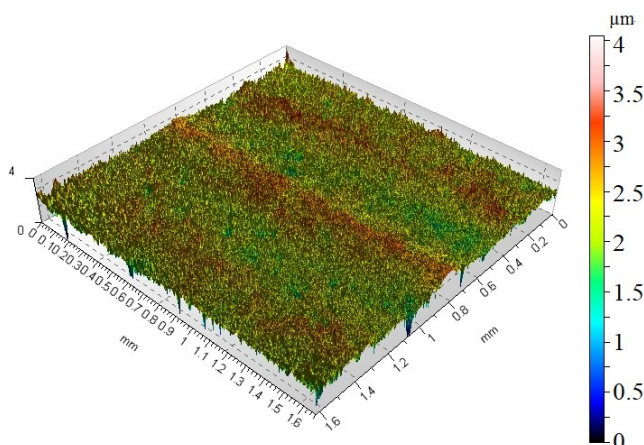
Three-dimensional optical surfaces of the brass bushing after vibratory deburring and polishing with abrasive paste on 90 min; $S_a = 0.26 \mu\text{m}$
